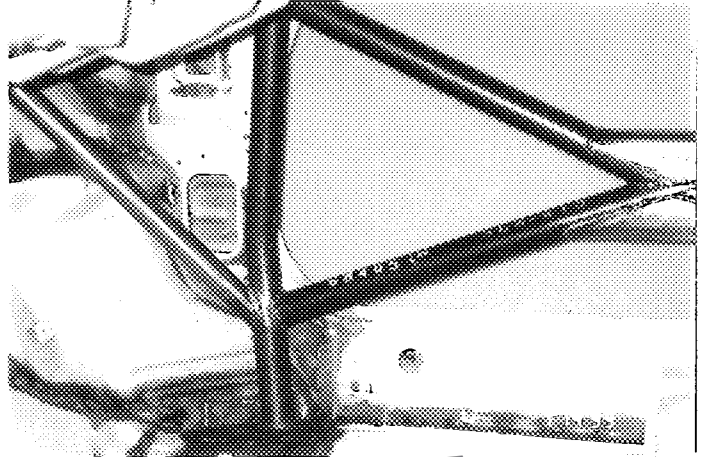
LATERAL BAR TO A-PILLAR
